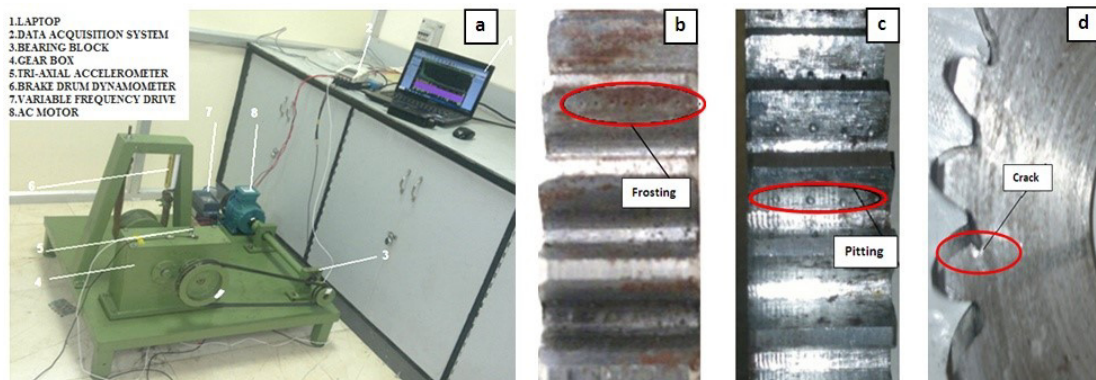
(a) Gear test rig (experimental set up) (b) frosting induced gear (c) pitting induced gear (d) crack induced gear
